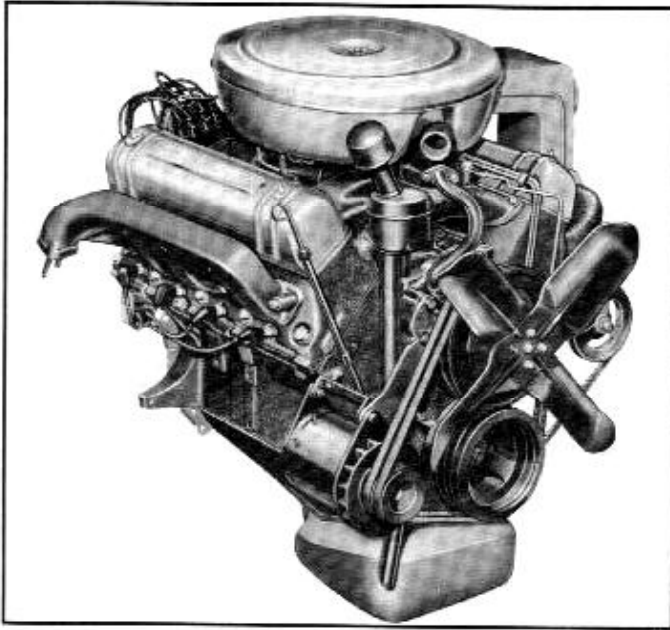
C-1—Right Front 3/4 View — 368 Cubic Inch Engine
